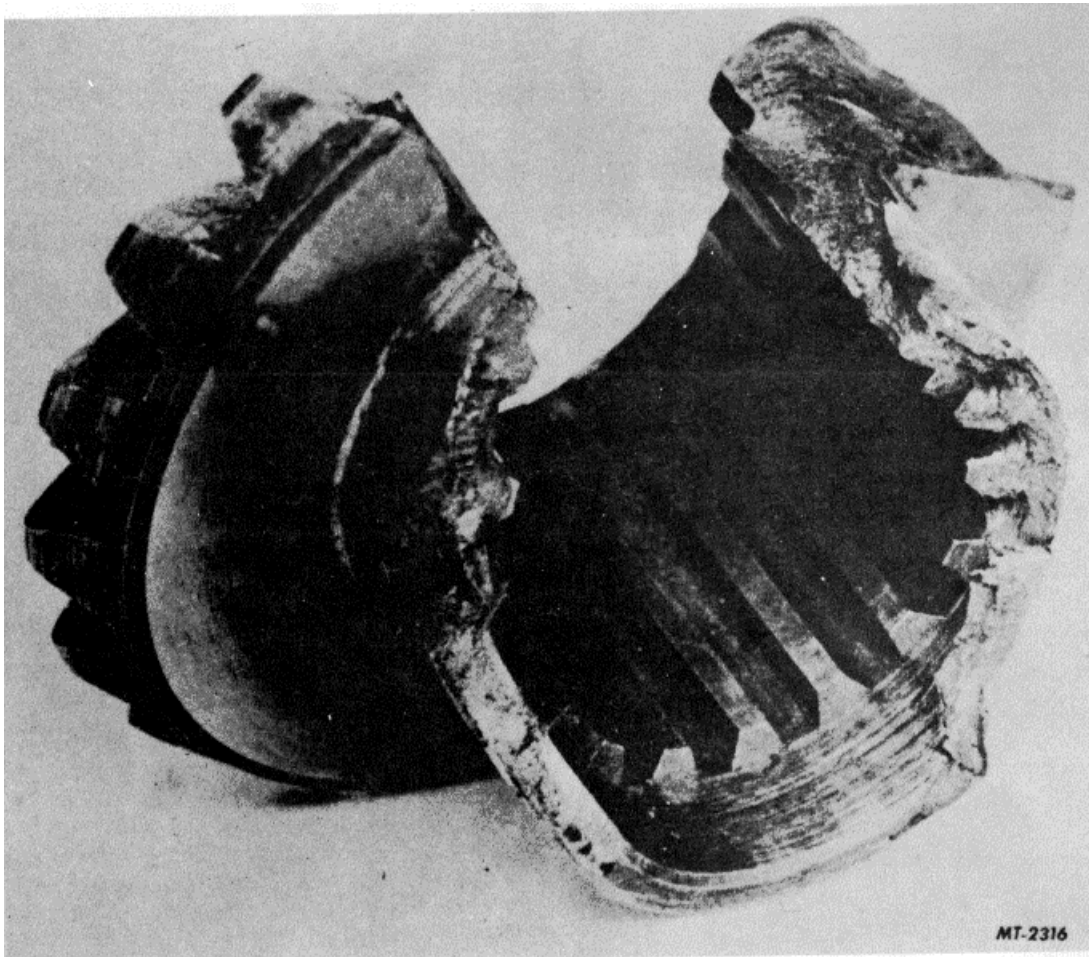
Fatigue Fracture-Misalignment.
